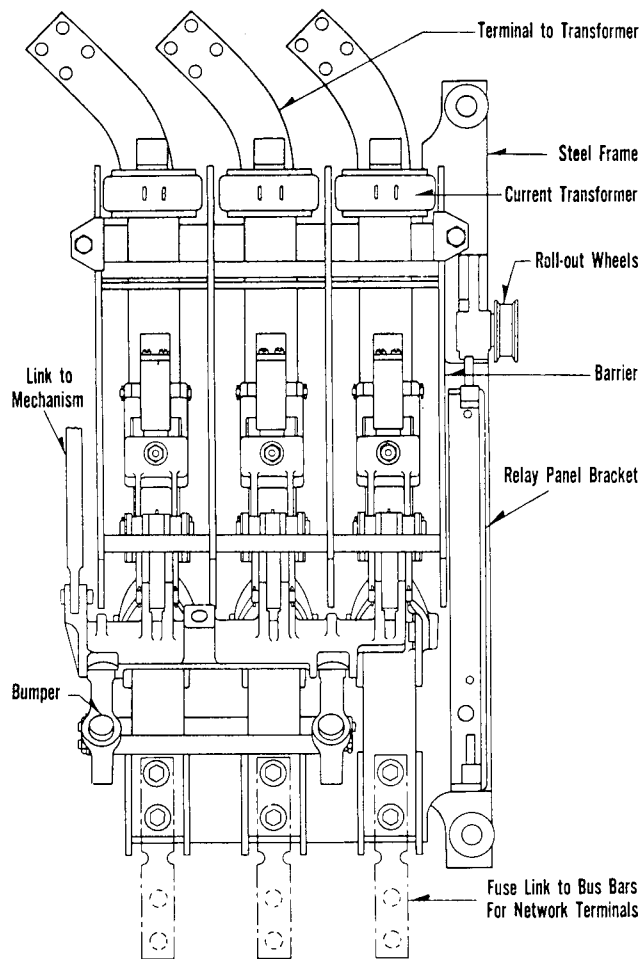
1200 AMPERE CIRCUIT-BREAKER FOR TRANSFORMER MOUNTED HOUSING — FRONT VIEW
